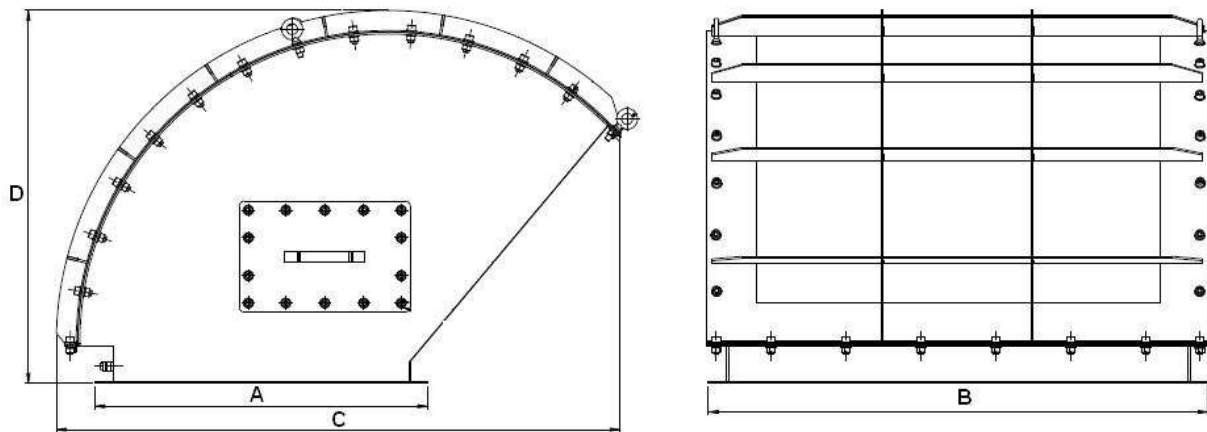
The Drawing of the Rectangular FLEX - Pie (R1 - R4)
